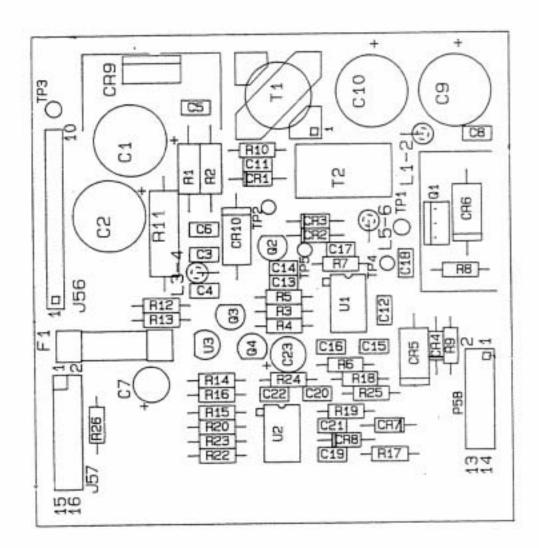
+12/23 Volt Board 0670-00-0450
